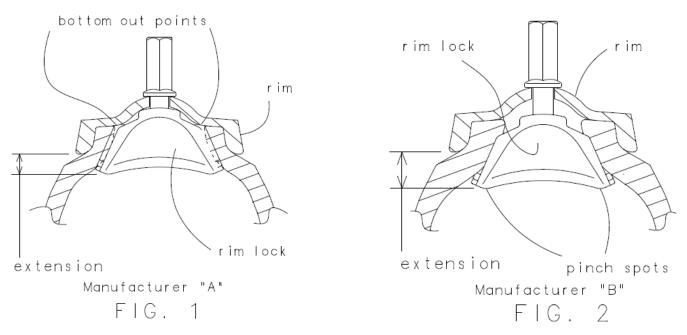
shows that with Manufacturer "B" the rim lock does not bottom out in the rim, but unnecessarily extends greater out from the edge of the rim which increases the chance for a straight impact pinch flat directly on the rim lock. The photos on the next page are a conventional rim lock with the tire of Manufacturer "A".
